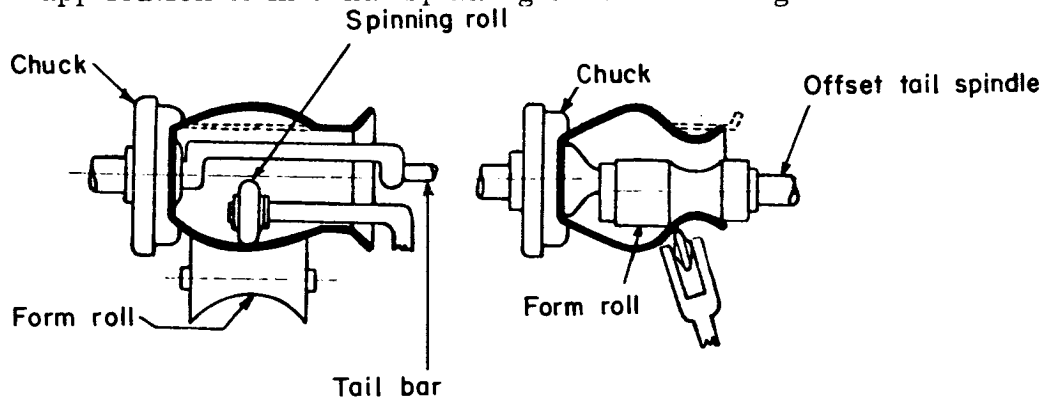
INTERNAL-SPINNING TECHNIQUES (REF. 74)
